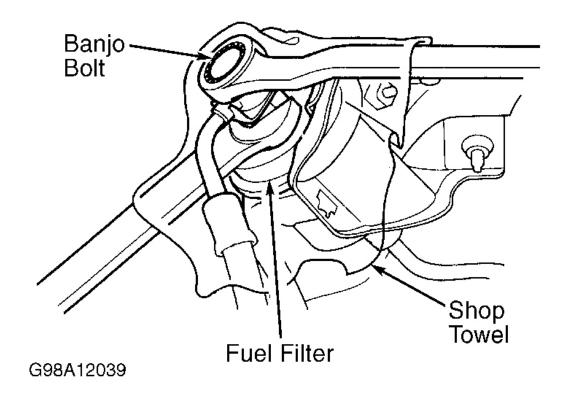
Releasing Fuel System Pressure Courtesy of AMERICAN HONDA MOTOR CO., INC.
